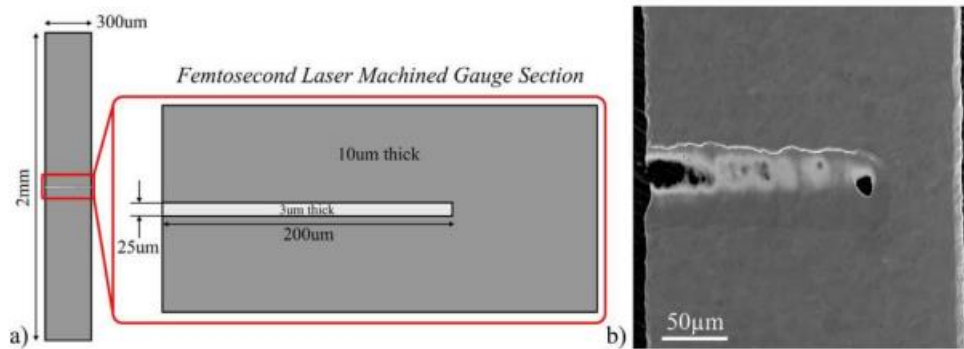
(a) dimensions of the final fs-laser fabricated copper micro-tensile TEM specimen, (b) SEM image of the copper micro-tensile specimen's gauge groove before FIB clean-up [40].
